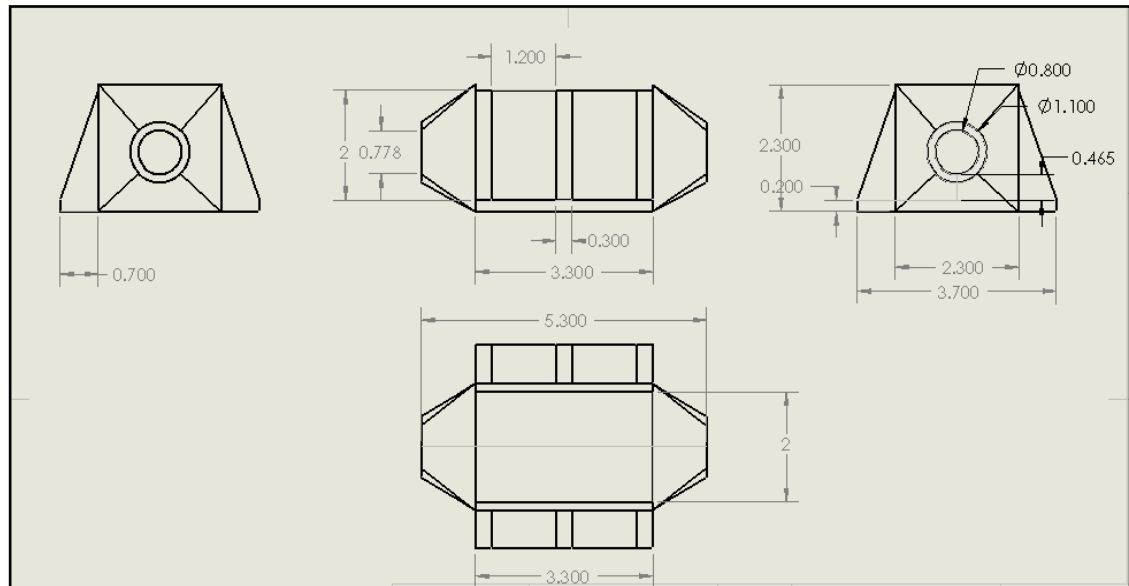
Triple Tank Circular Diffuser Design 2D view (Tank 1)
